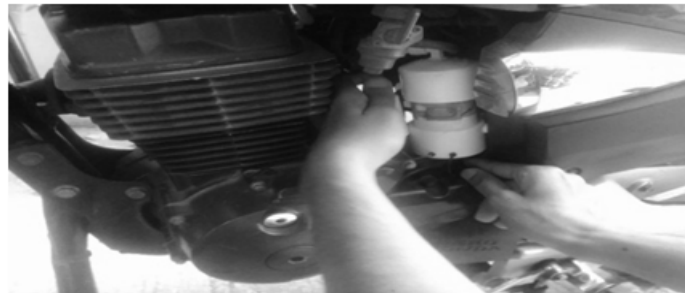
Mounting the Booster to the Chassis Using a Zip Tie Belts
